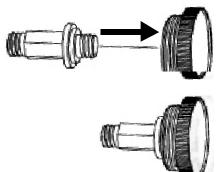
Turning Pressure Selecting Screw Over and Attaching to Regulator Cap – Natural Gas Position
